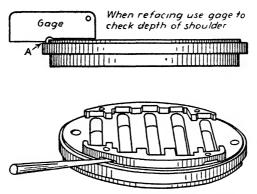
Remove guides with a screw driver before machining channel-valve seats.
